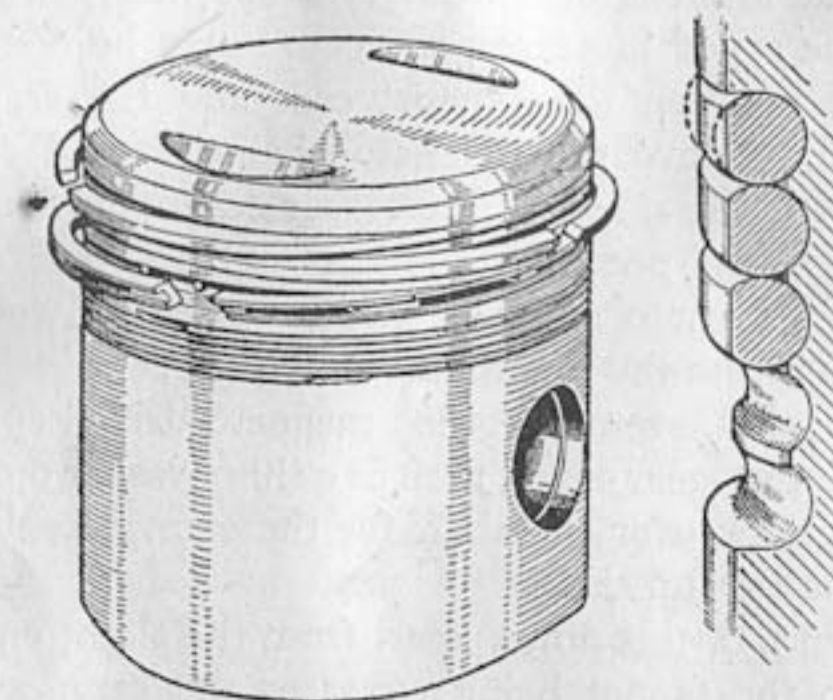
WIRE-WOUND CLOSE-FITTING PISTON.
